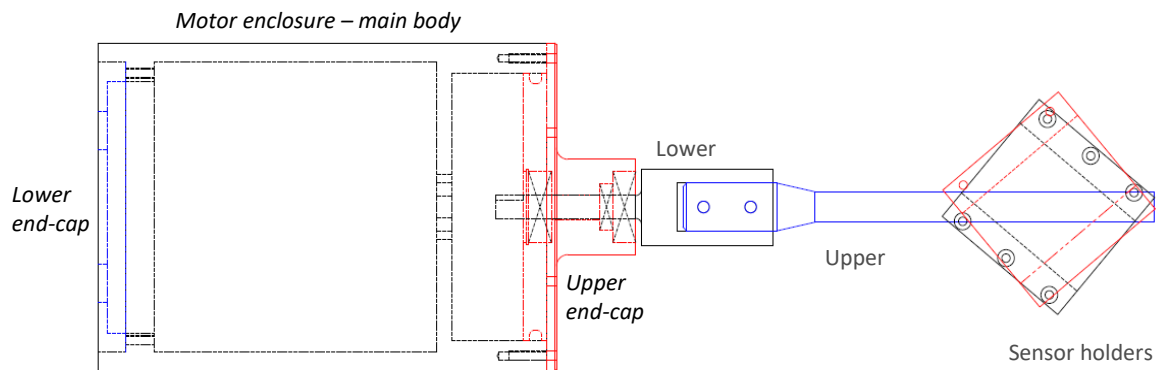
Radiance sensors and stepping motor enclosure general assembly schematic, Individual elements are represented by different colours to the adjoining assembly.
